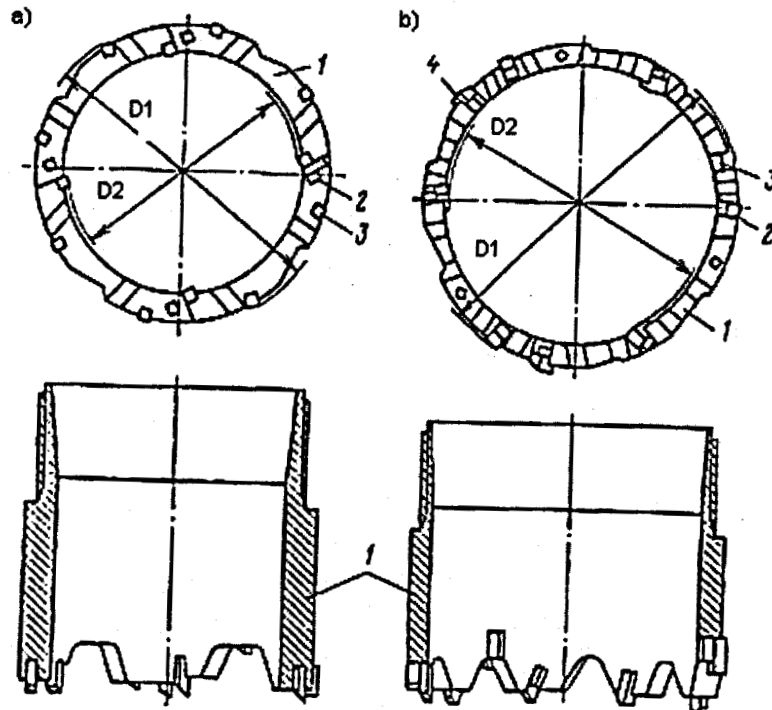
Core drill bits with WC/Co cutters: 1-steel holder; 2-4 cutters.
